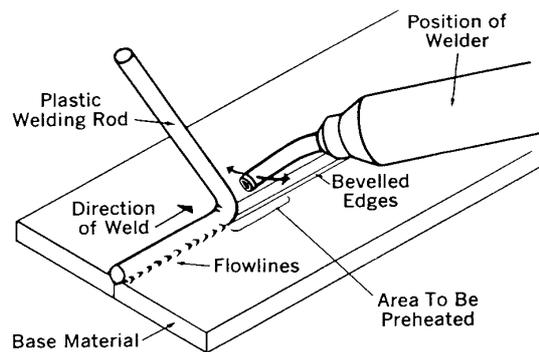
Hot gas welding process. (Courtesy: Kamweld Plastics, Inc., Norwood, Mass)
